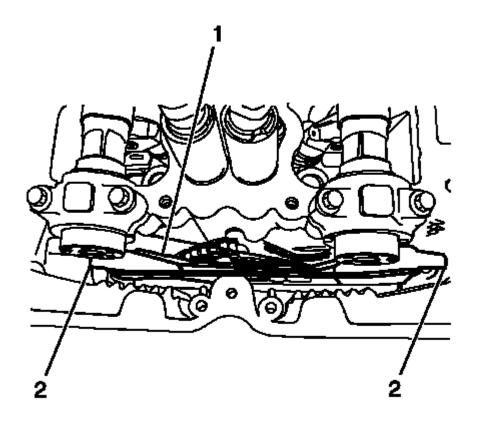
Fixed Timing Chain Guide Access Plug Courtesy of GENERAL MOTORS COMPANY
